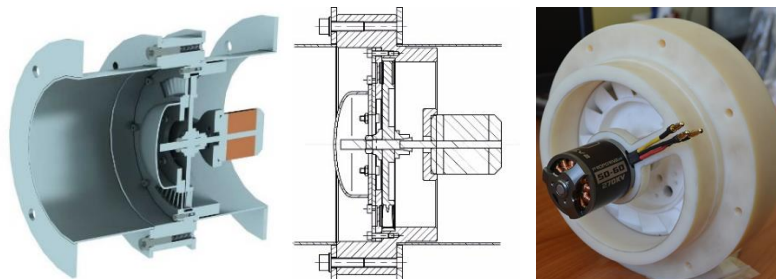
Design of the air turbine for tests of AM components and photograph of its assembled central part
